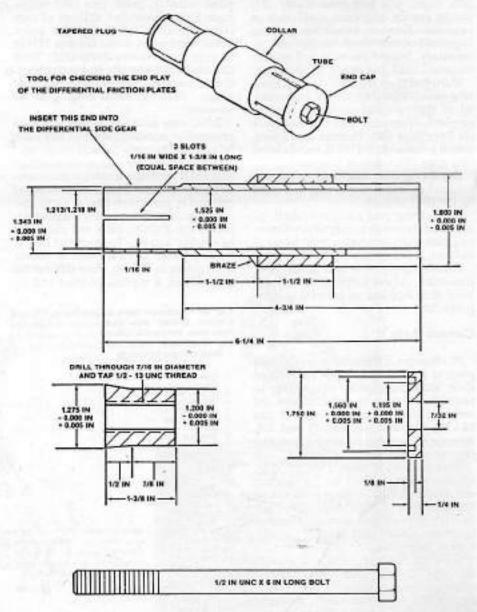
Diagram showing dimensions for special tool used in checking end play in friction plates in Carrero front drive exies. This tool must be fabricated locally as it is unavailable from any other
